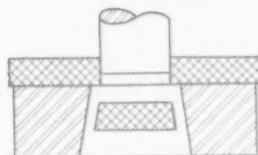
For best tool life the tool shank axis must lie in the exact center of all cutting edges.
